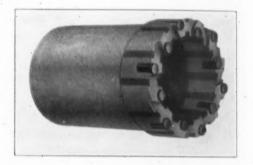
Core-Drilling Head for Stone, with Inserted Octagon Tungsten Carbide Paints
